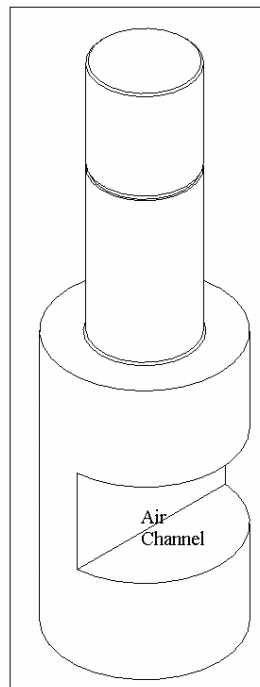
Compressor Discharge Valve & Turbine Inlet Valve
